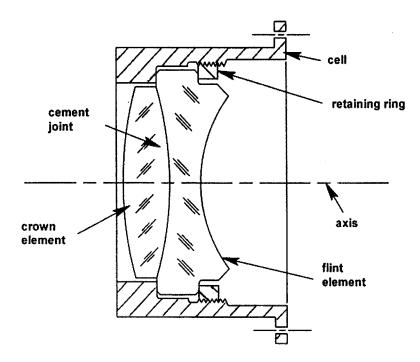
Mounting for a cemented doublet lens with the flint element larger in diameter than the crown element.
